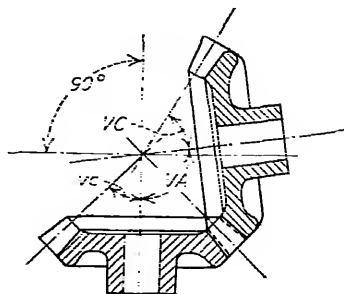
Bevel gears with shafts at more than 90 deg.
